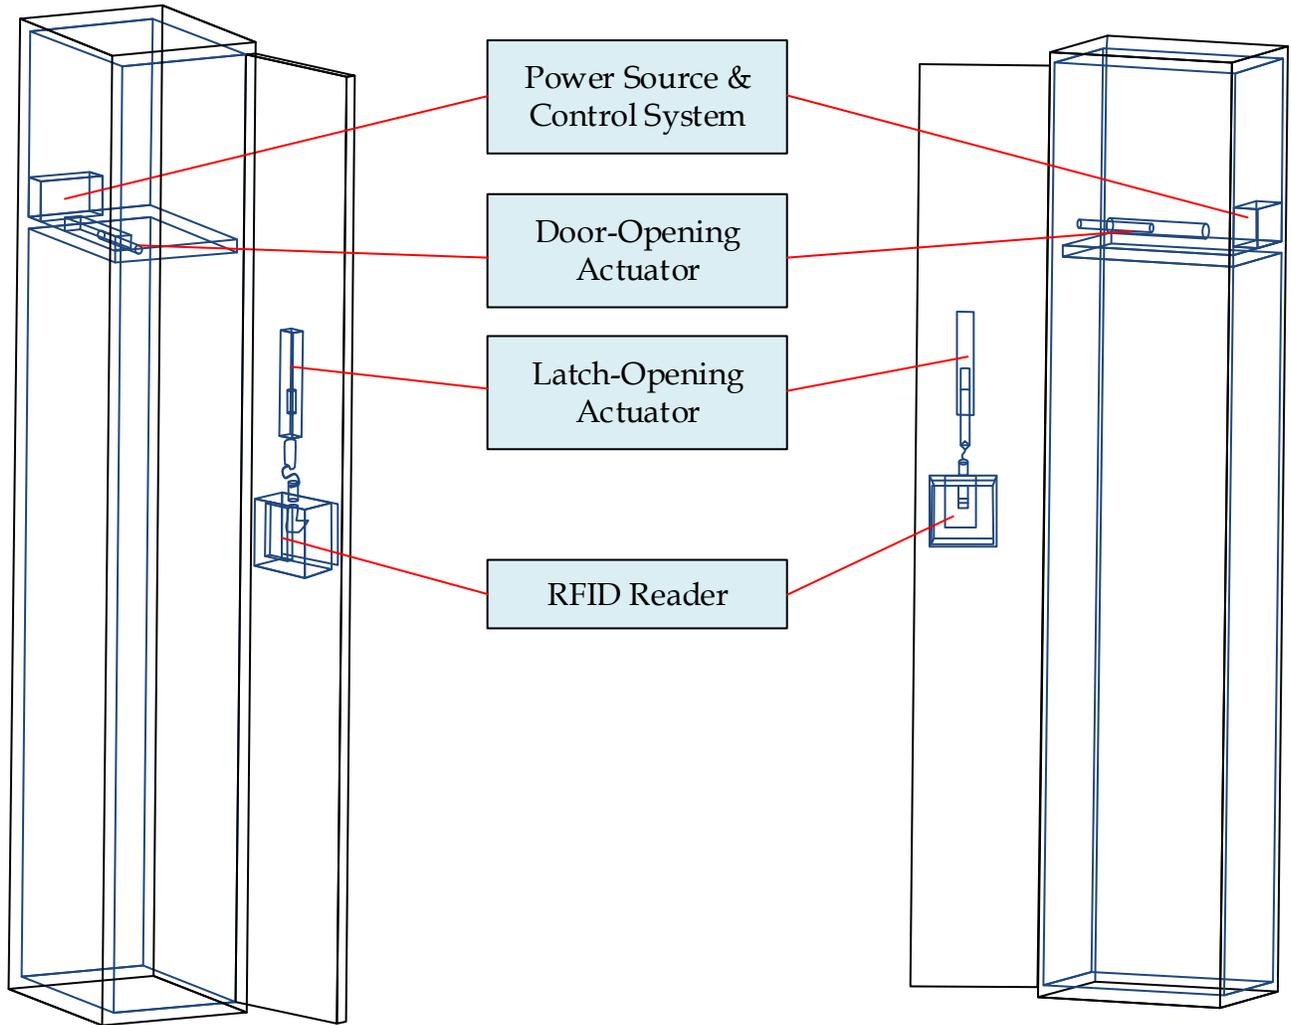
Assembly drawing of the Locker Independence Design illustrating the various design components.
